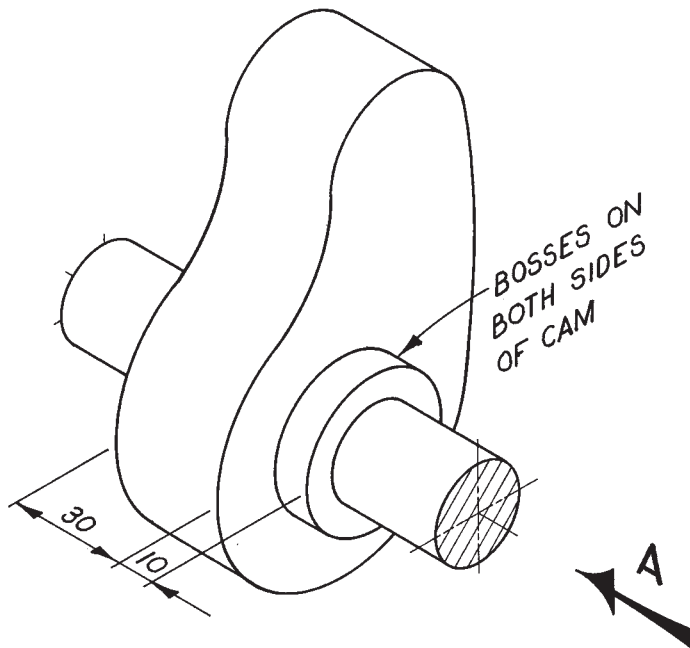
PICTORIAL DRAWING OF CAM/SHAFT ASSEMBLY (NOT TO SCALE)
